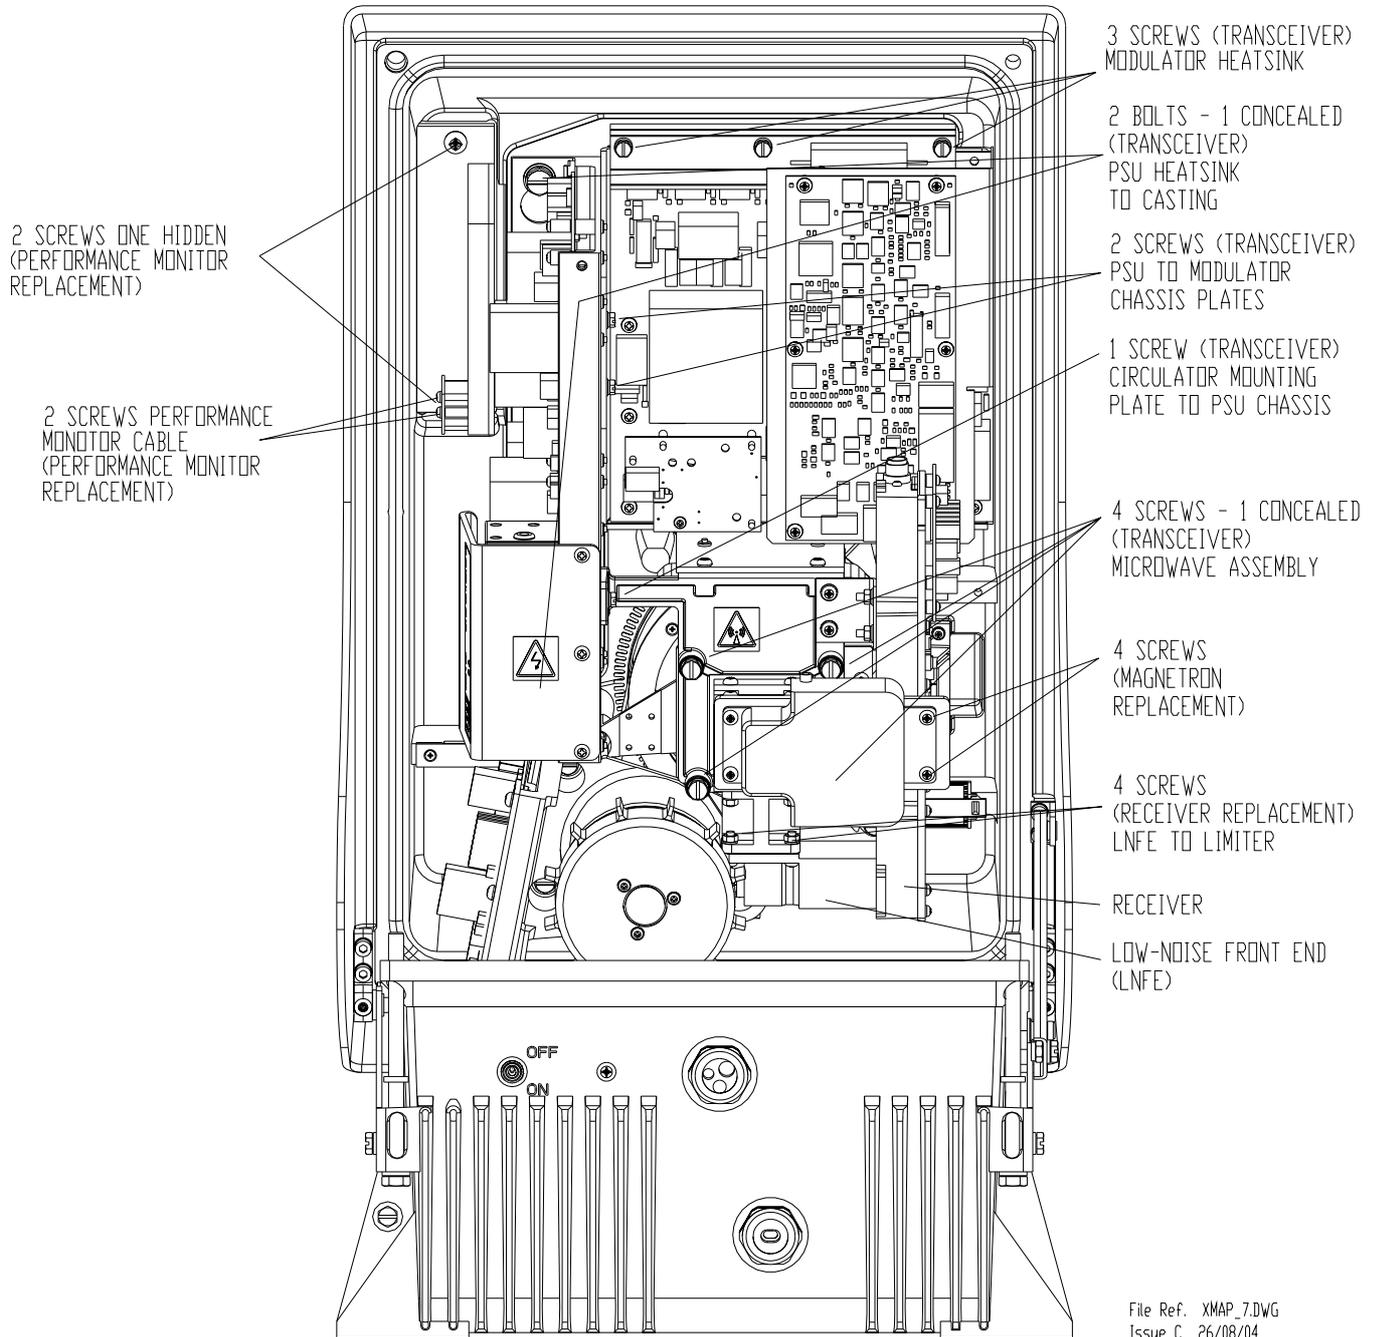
X-Band Masthead Turning Unit – Fitment of Main Assemblies
